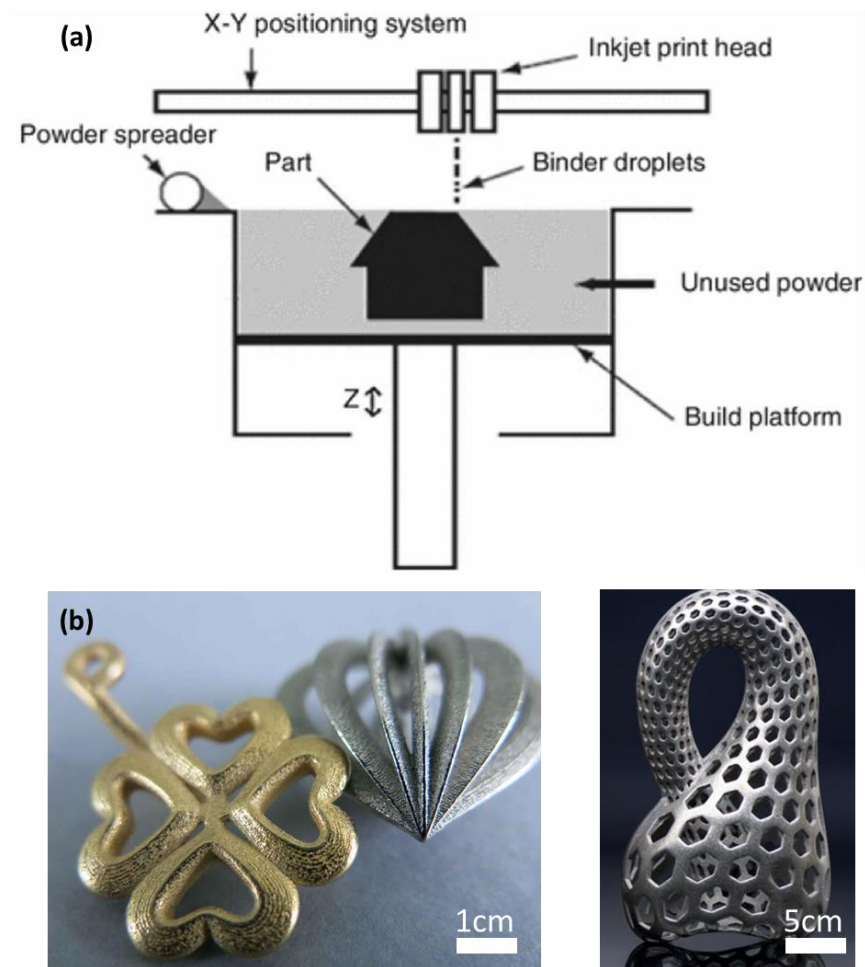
Binder jetting (a) A schematic of a typical binder jetting printer [63], (b) 3D metal arts fabricated through binder jetting using stainless steel and copper, respectively [64, 65].
